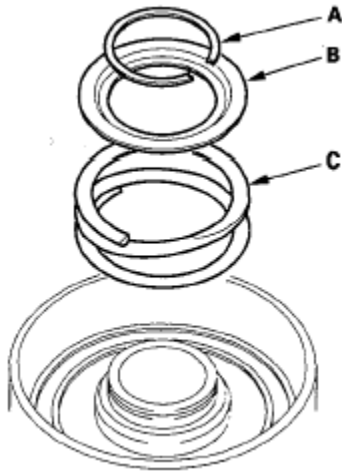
Identifying Snap Ring, Spring Retainer And Return Spring
